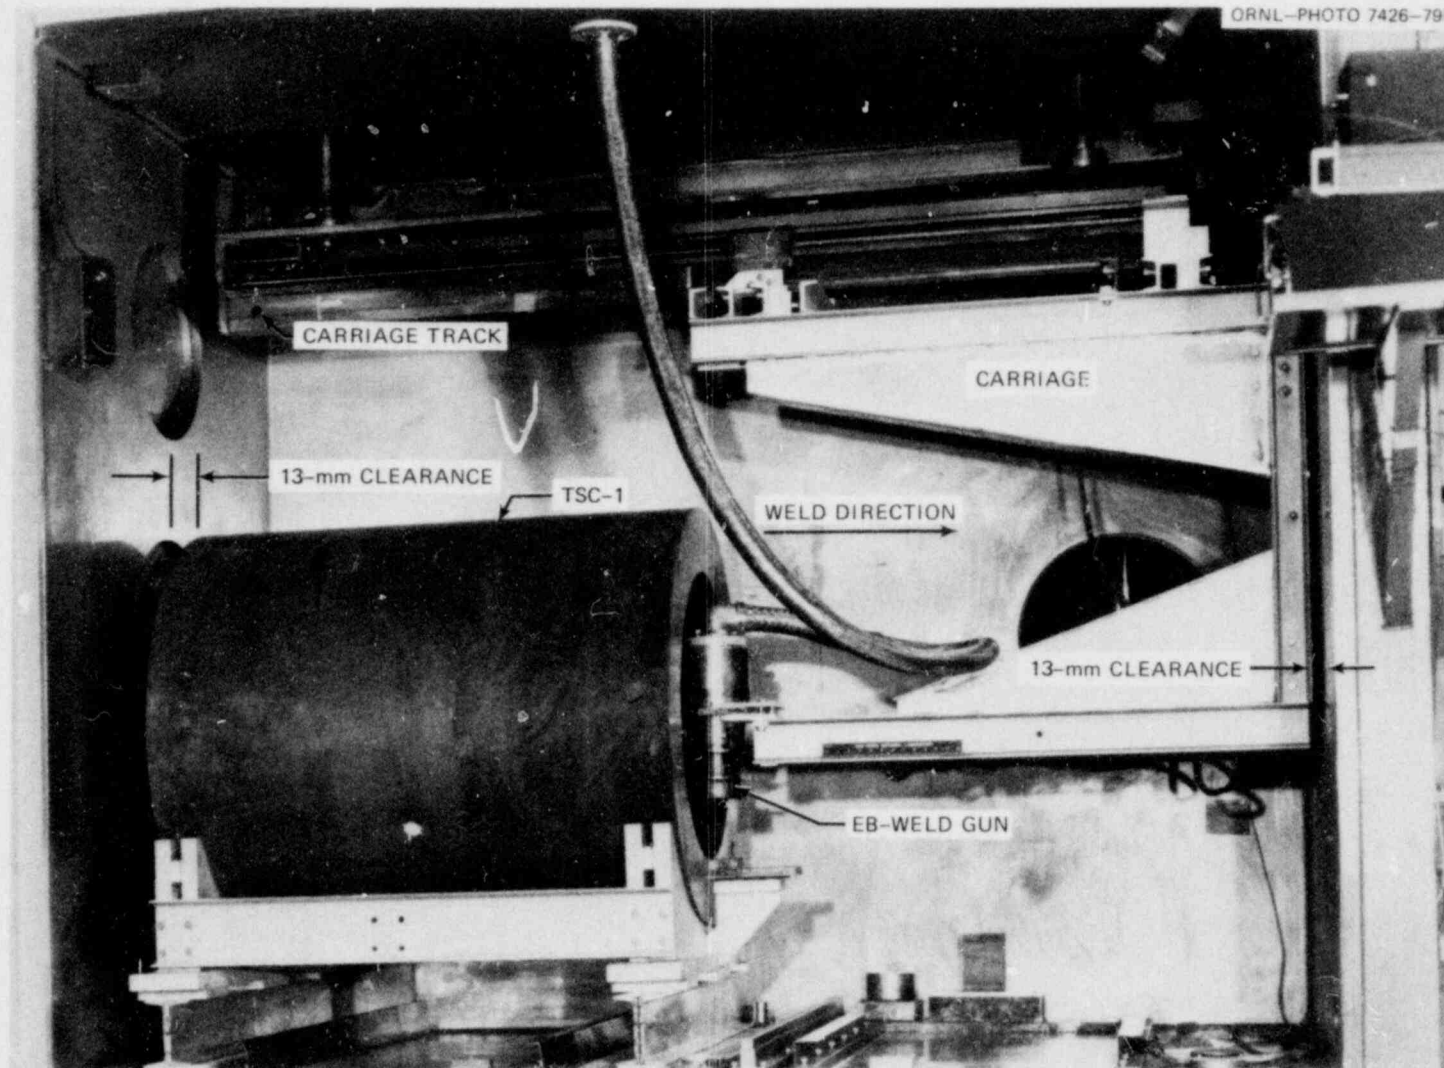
View of interior of EB-weld box in TSC-1.
